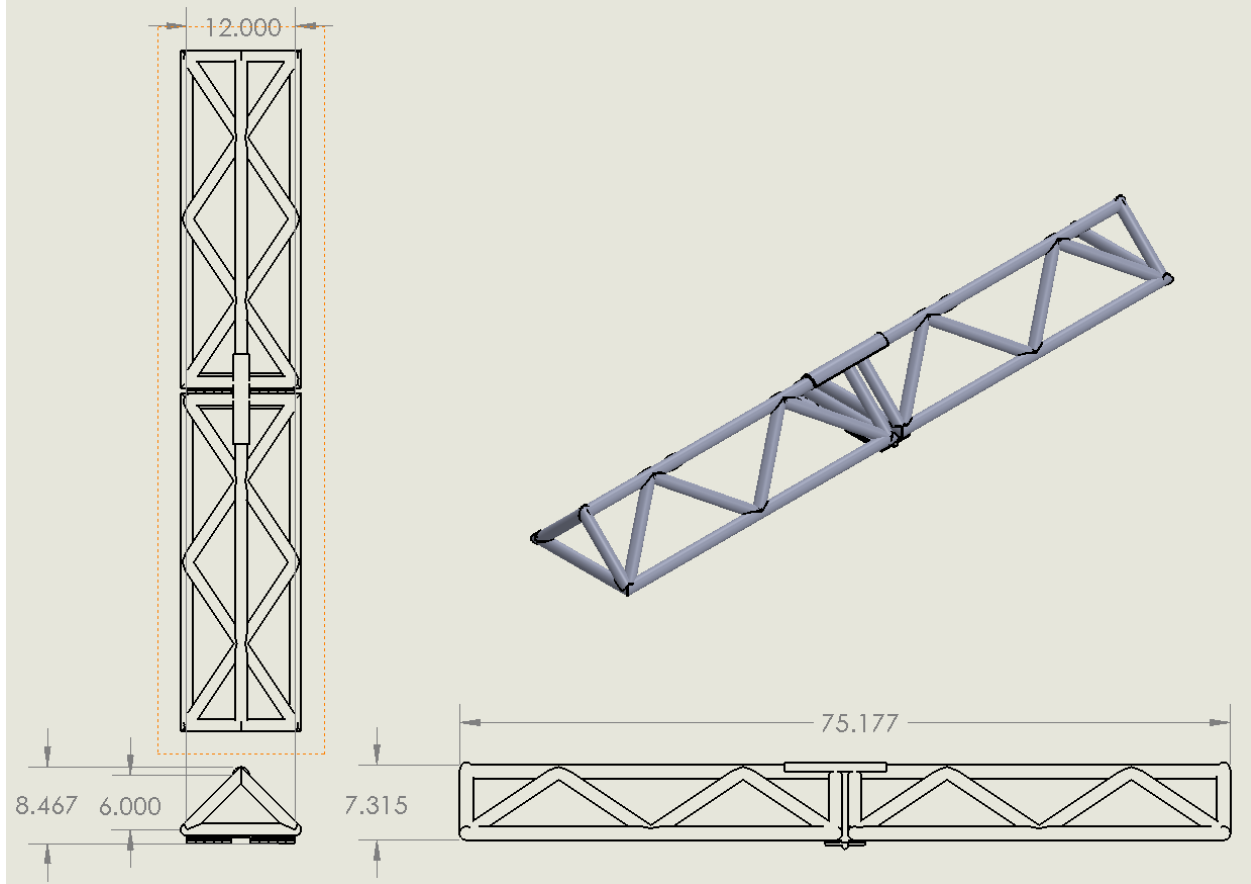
Two piece trapezoidal frame with the front, side, and isometric view
